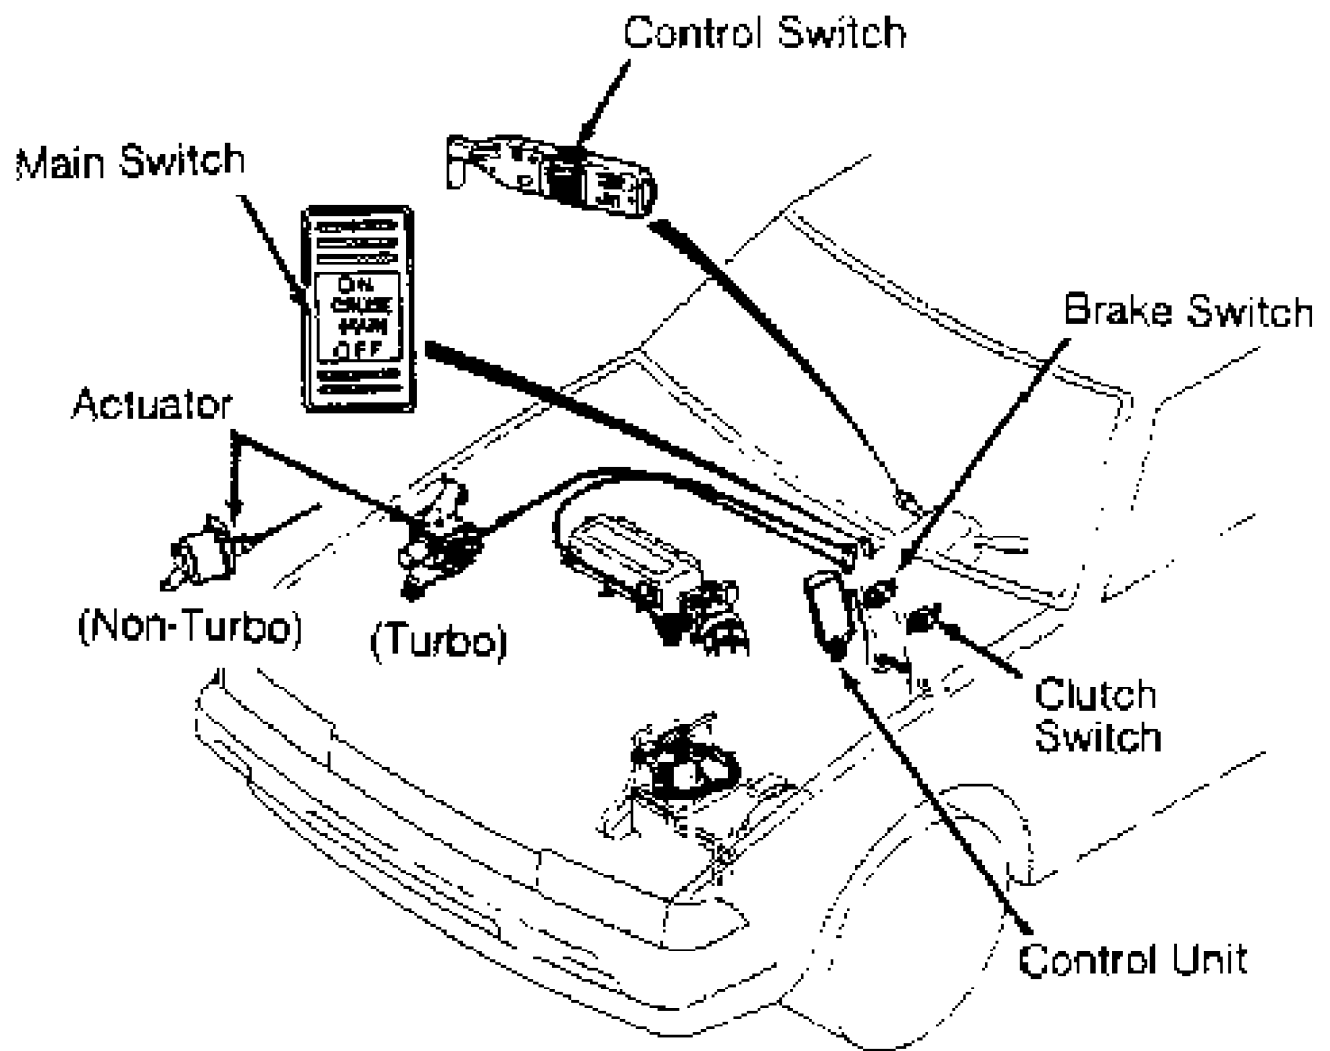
Locating Cruise Control Components (MX-6 & 626)
